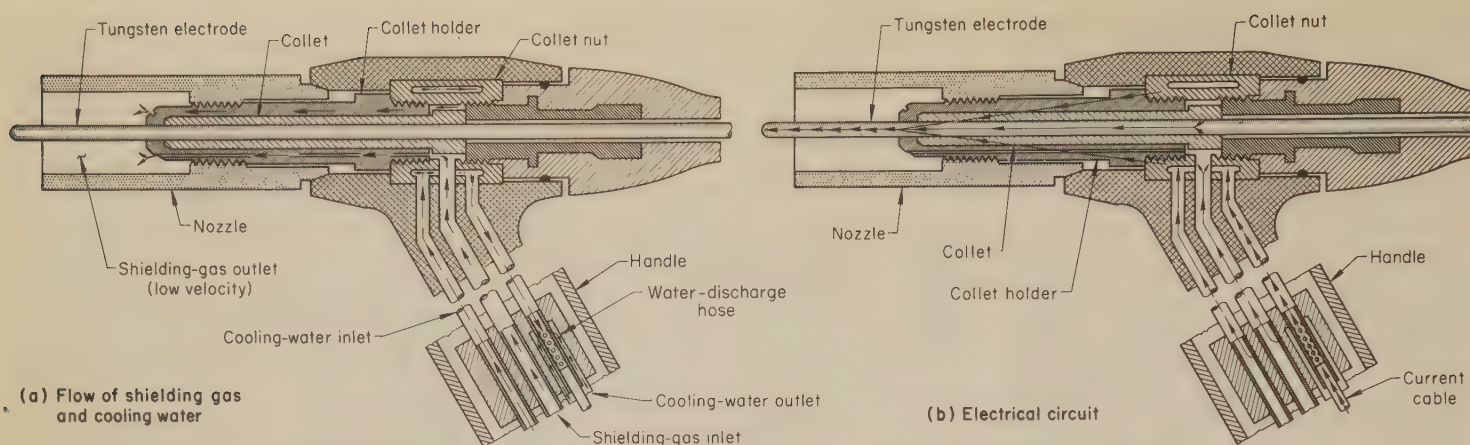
Sectional views of a typical water-cooled torch for manual gas tungsten-arc welding
